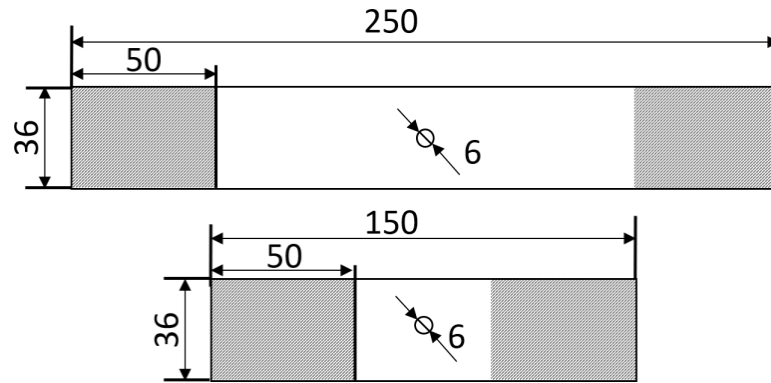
Specimen shapes. Top: tensile specimen. Bottom: compression specimen. The grey area is the clamped area
